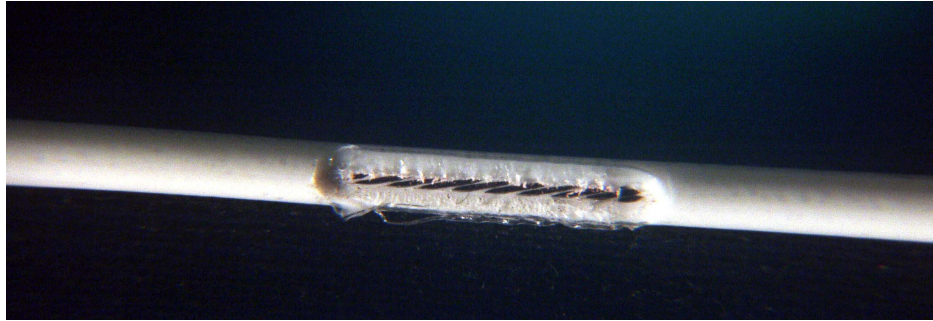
, Full Wire Insulation Abrasion Exposing Conductor.
